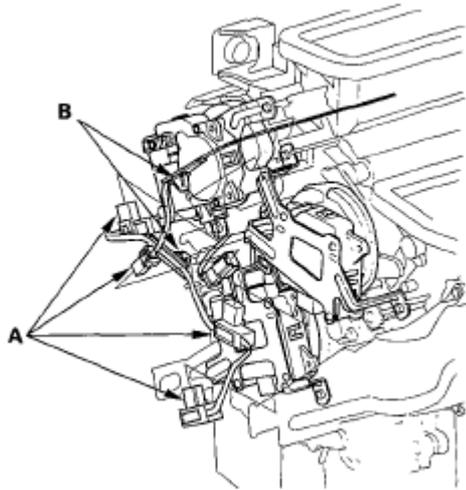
Identifying Control Motors And Sensor Connectors, And Wire Harness Clips
